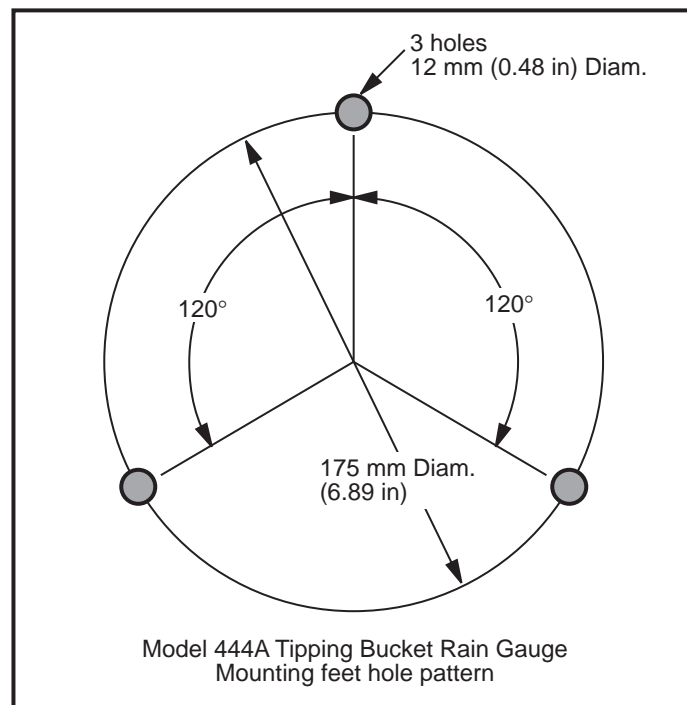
C Mounting hole pattern for the Model 444A Tipping Bucket Rain Gauge
